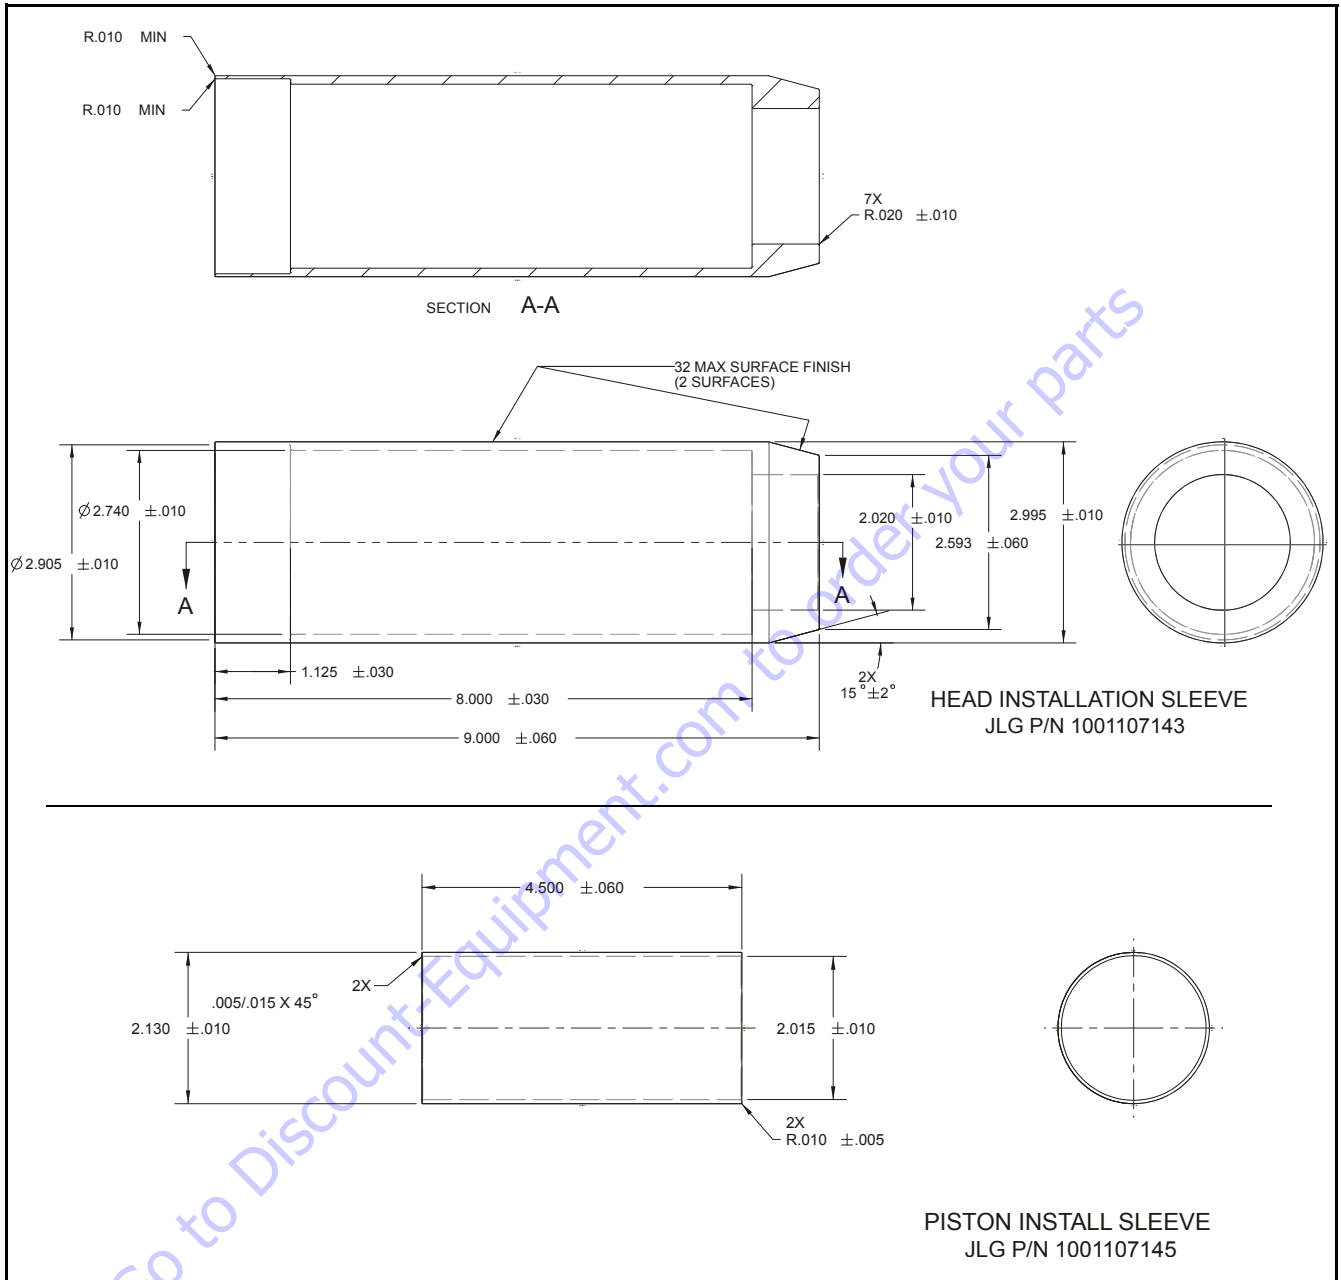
Special Tools for Tower Tele Cylinder - Sheet 1 of 2
